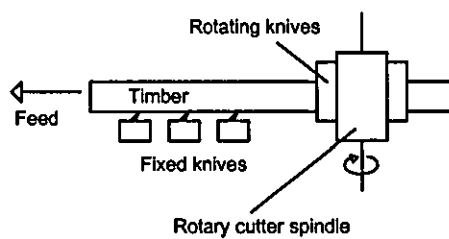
Datum face machining and surface planing
